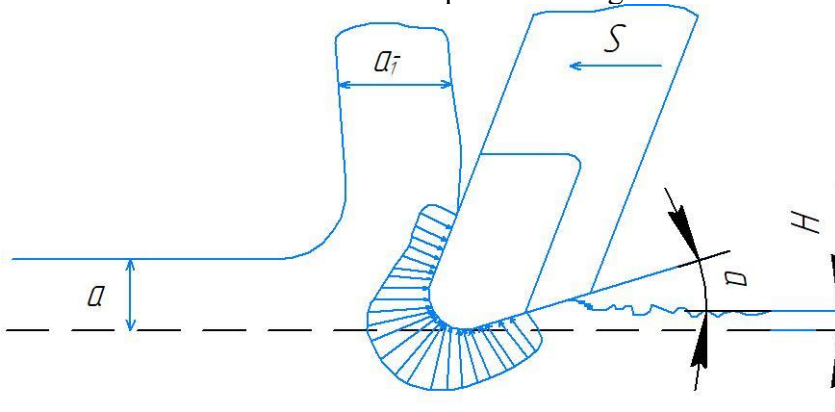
Contact zone of the rear surface of the tool and the workpiece when processing fiberglass
